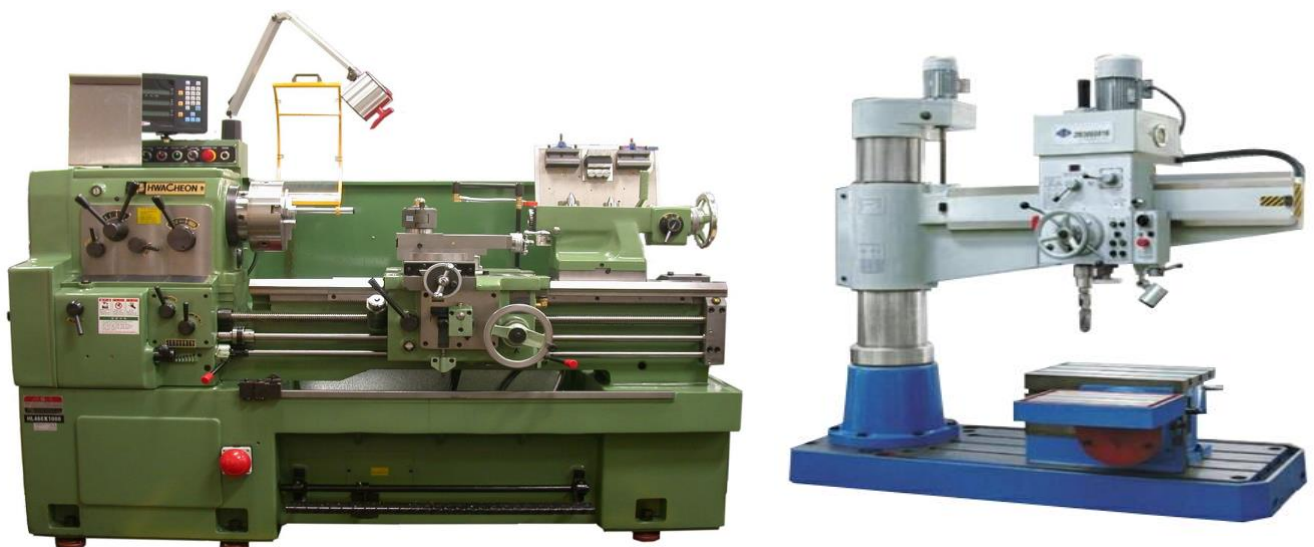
Tool Room (Lathe and Radial Drill Machine)
